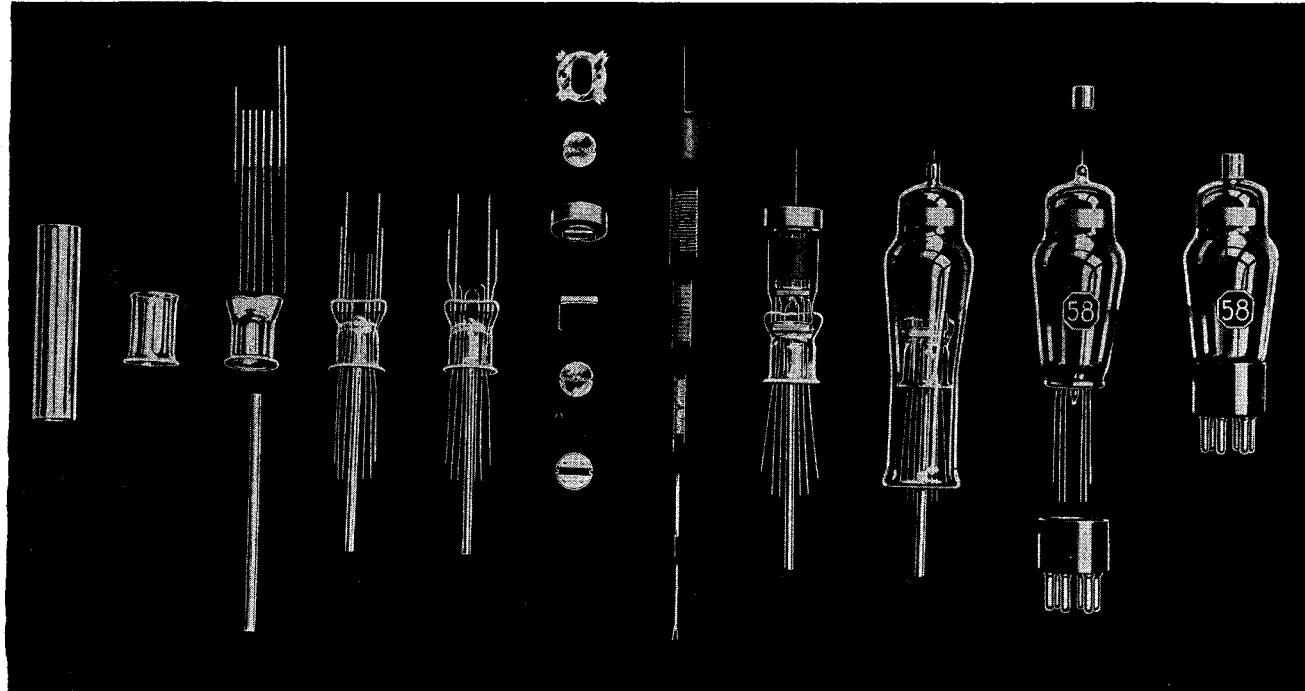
Assembly of typical glass receiving tube. (*Courtesy of Radio Corporation of America.*)
